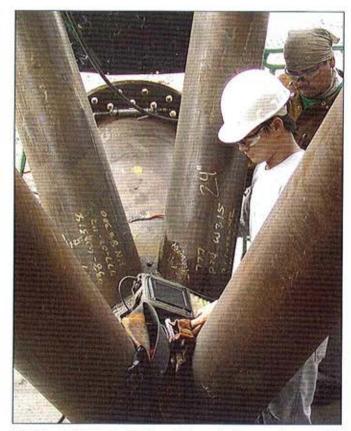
UT inspector Stephen Tekoseno testing an open-root CJP weld. Welder Pedro Leyva looks on to make sure his welding is acceptable.
